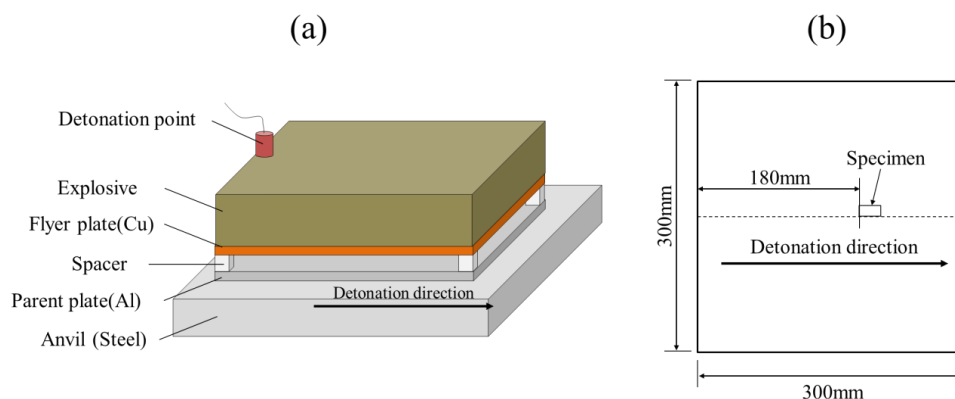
(a) Schematic illustration of the explosive welding setup, (b) Position of the specimen
